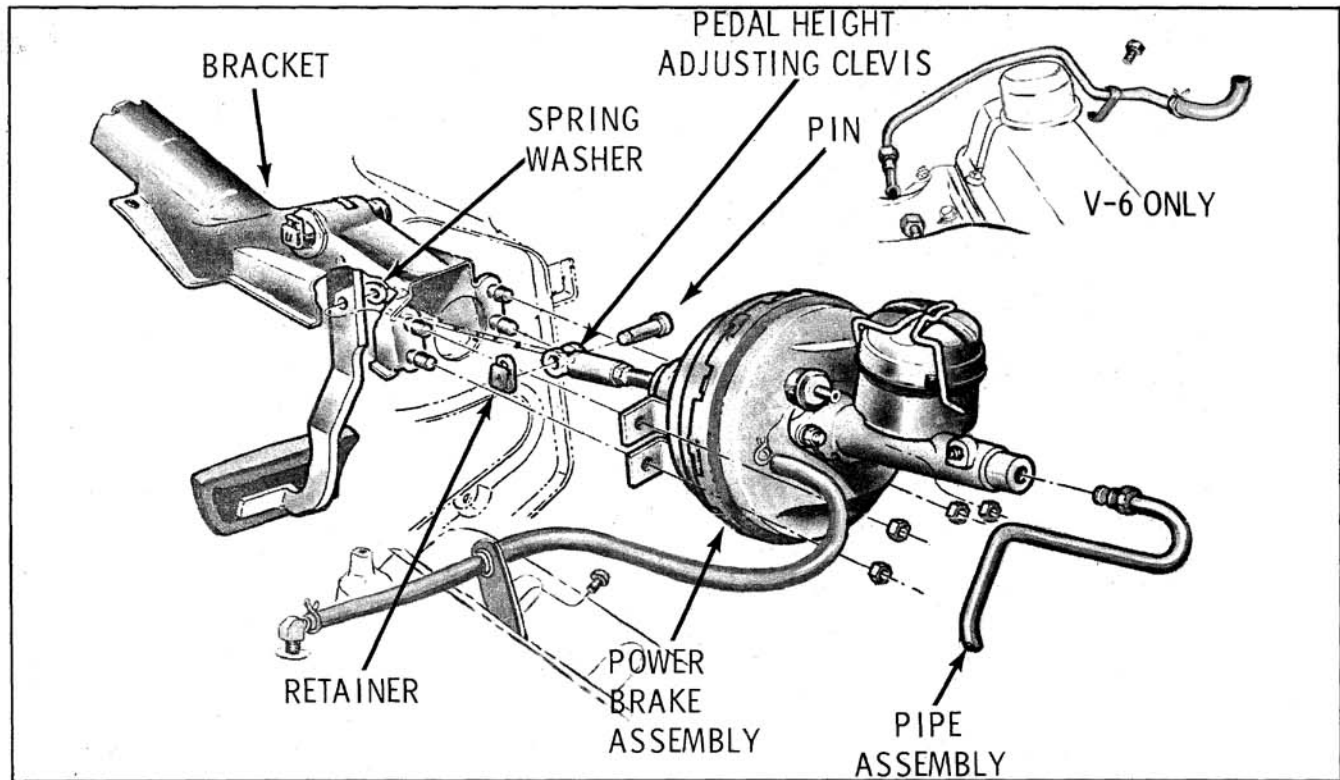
Power Brake Mounting (33 through 38 Series)
